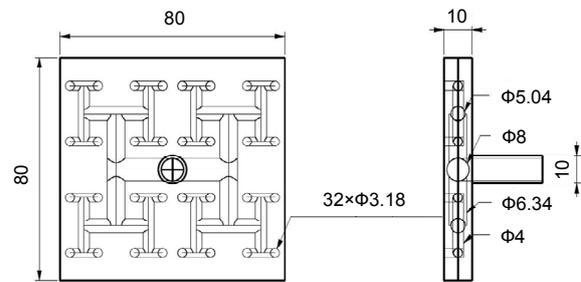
Sketch of the flow distributor prototype, built using a Makerbot Replicator 2X by means of fused deposition modeling (FDM) (unit: mm)
